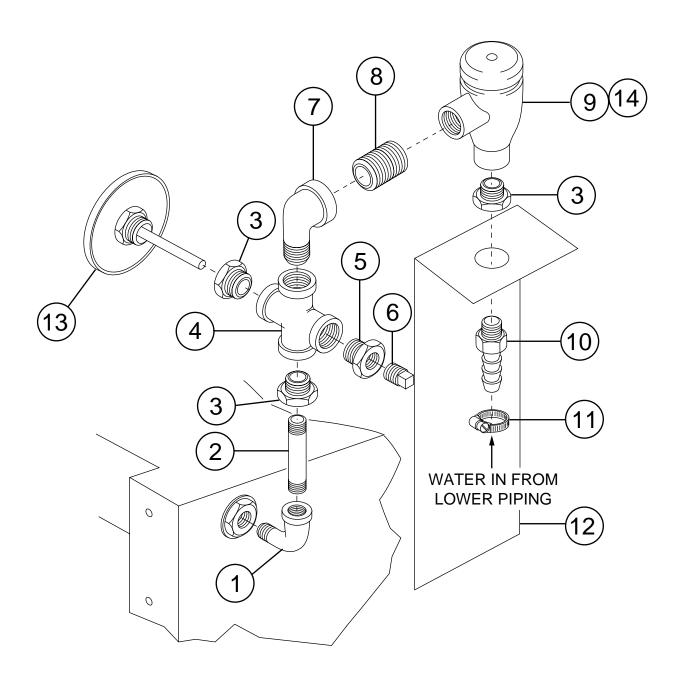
MH-60/6N Only Upper Fill Piping Assembly
